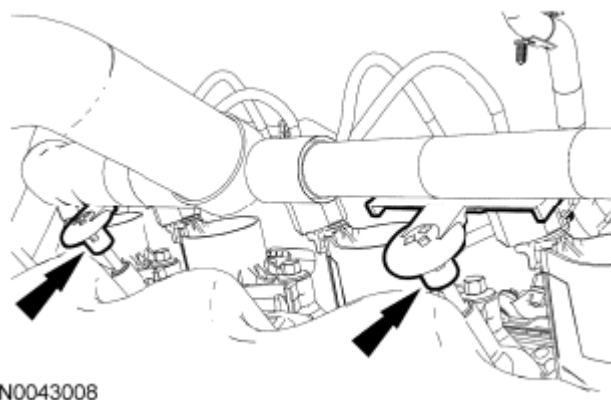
Locating Wiring Harness Retainers And RH Valve Cover Studs
